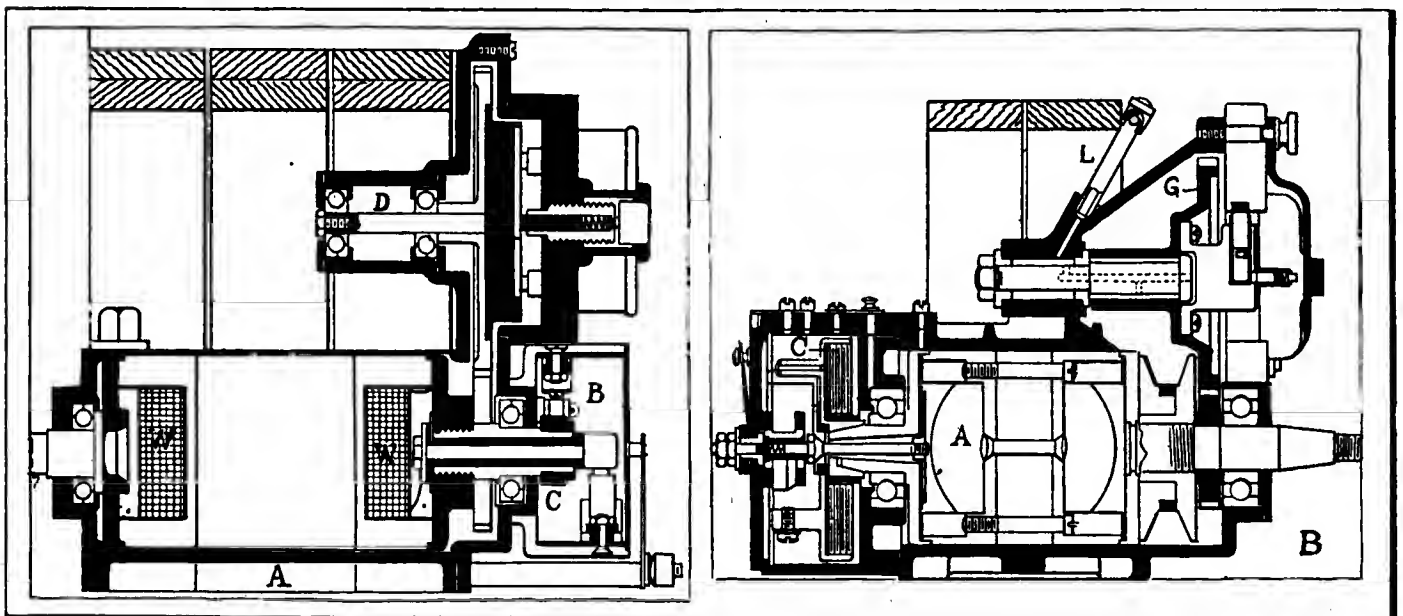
(A) Section of Splittdorf magneto, showing annular ball bearings for mounting, (B) Section of new Kingston magneto
